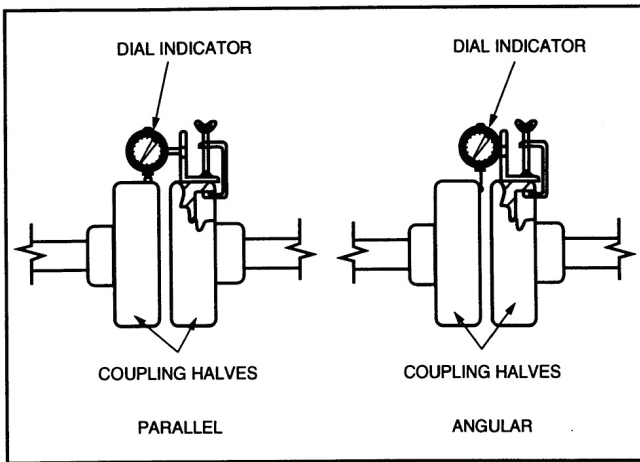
CHECKING ALIGNMENT WITH DIAL INDICATOR
